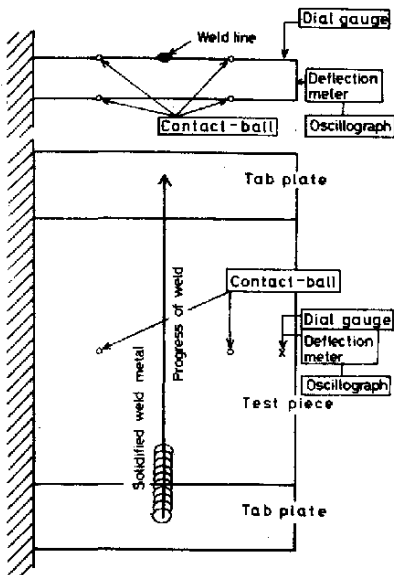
Apparatus of welding deformations measurement
